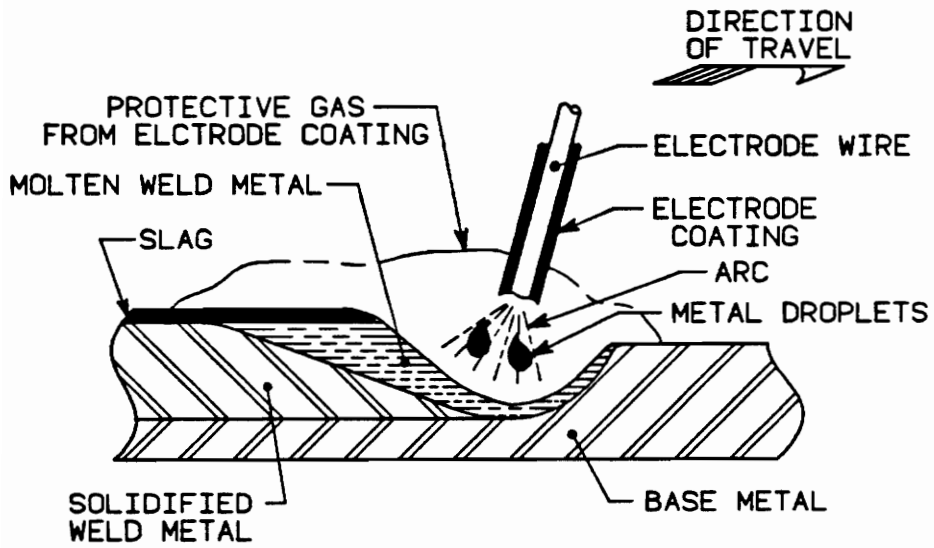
Shielded Metal-Arc Welding Process Diagram [1, p.128].
